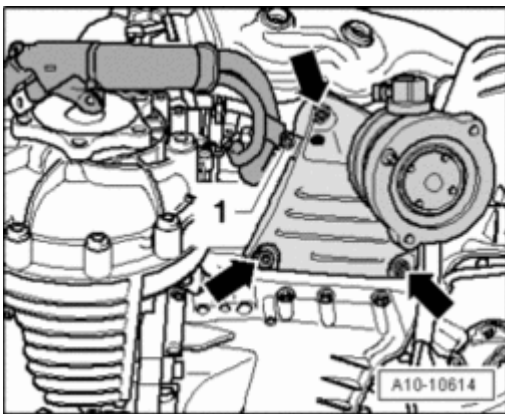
Removing Wiring Harness From Engine Mount & Engine Mount
